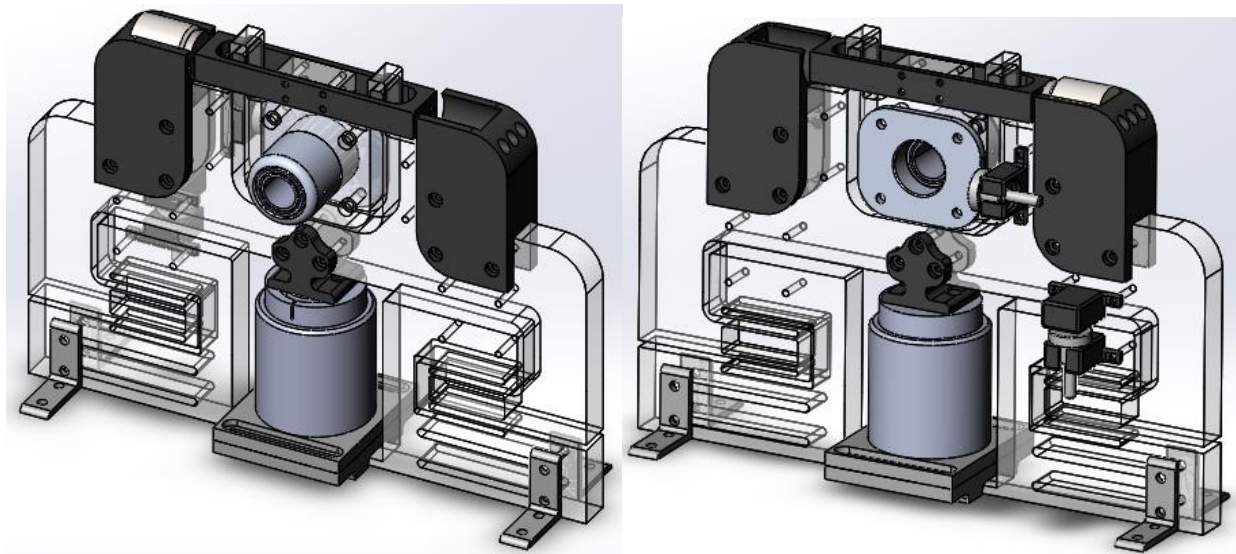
New printhead mechanism assembly design, front and back, featuring capacitive sensors and VCA connectors built into mechanism. Nuts/bolts omitted from drawing.
